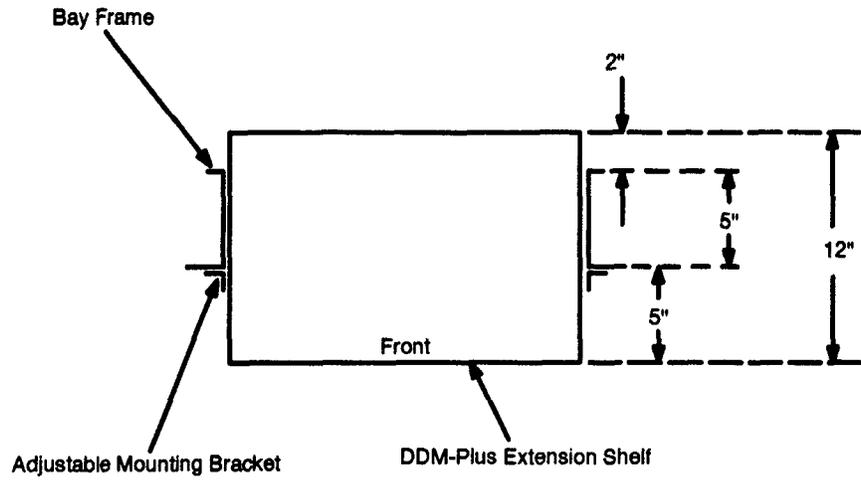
ED-8C501-50 — Front Mount with Rear Access
